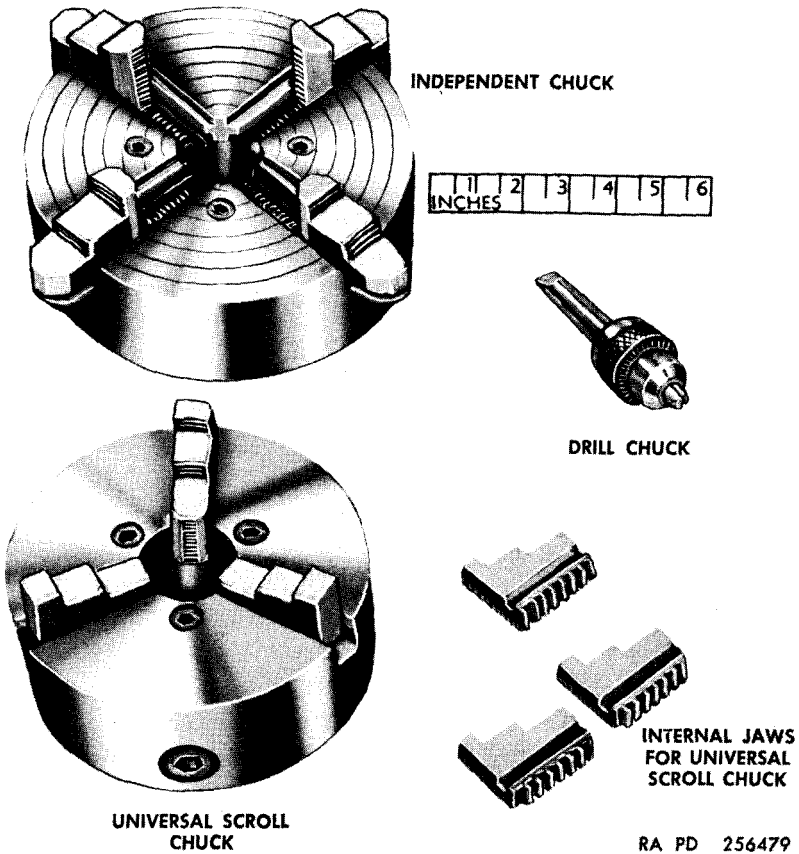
Independent chuck, universal scroll chuck, and drill chuck used with the lathe.
